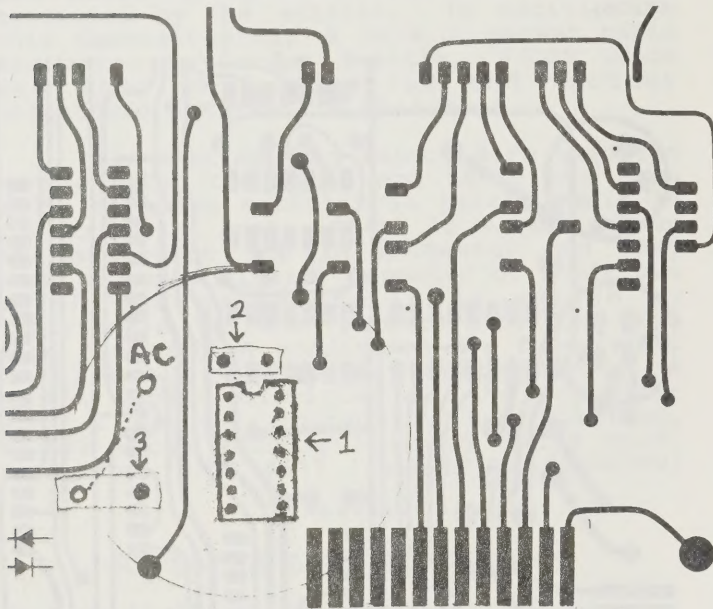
Part of top of PC board. Showing locations of holes to drill.
